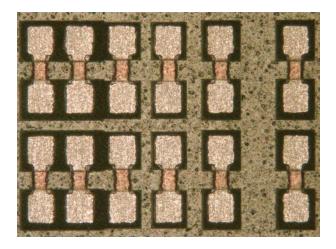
Photograph of Pads and Solder Mask Showing Lack of Solder Mask between Pads with 4mil and 5 mil spacing. The other pad spacings are 6mil, 8mil and 15mil.
